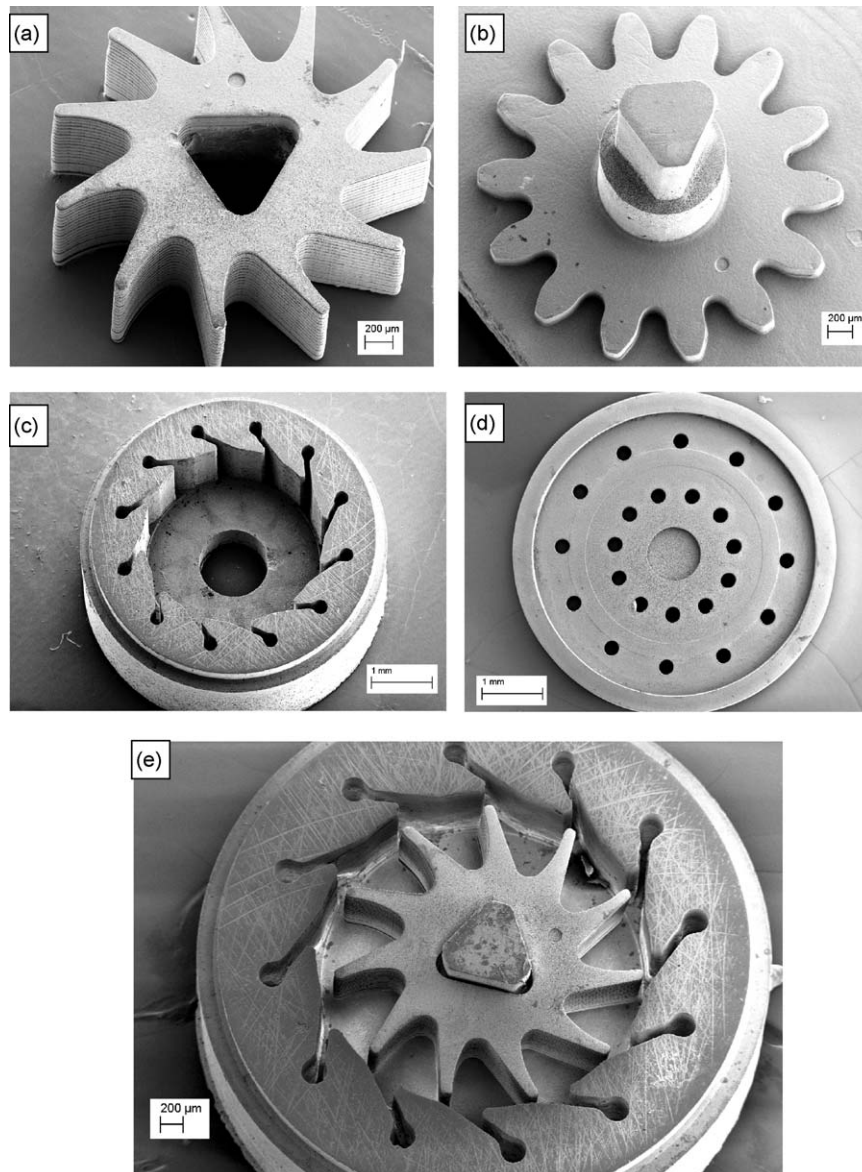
Prototypic components of a micro-turbine after sintering, using composition YA-3: (a) rotor, (b) trigonal axis with sun-wheel, (c) nozzle plate, (d) case, and (e) partly assembled turbine.
